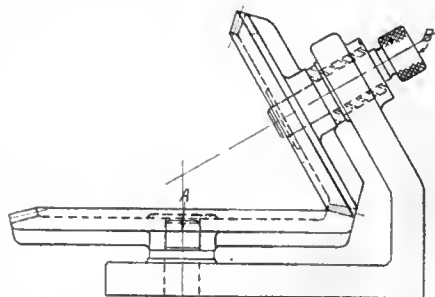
BEVEL GEAR-TESTING FIXTURE.
